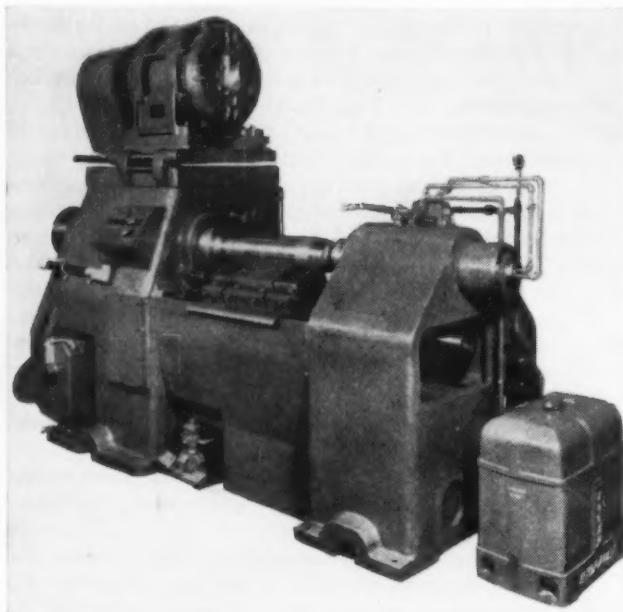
N.M.T.B.A. AUTOMATIC SHELL MACHINE—6-IN. LINE
